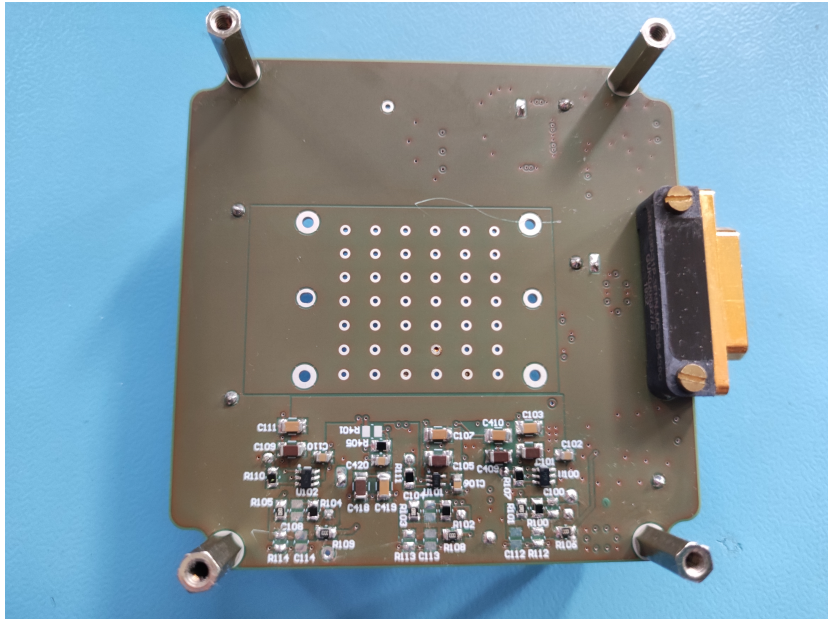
FPA Board Bottom View - *Only the buffer circuits are placed on the bottom side.
